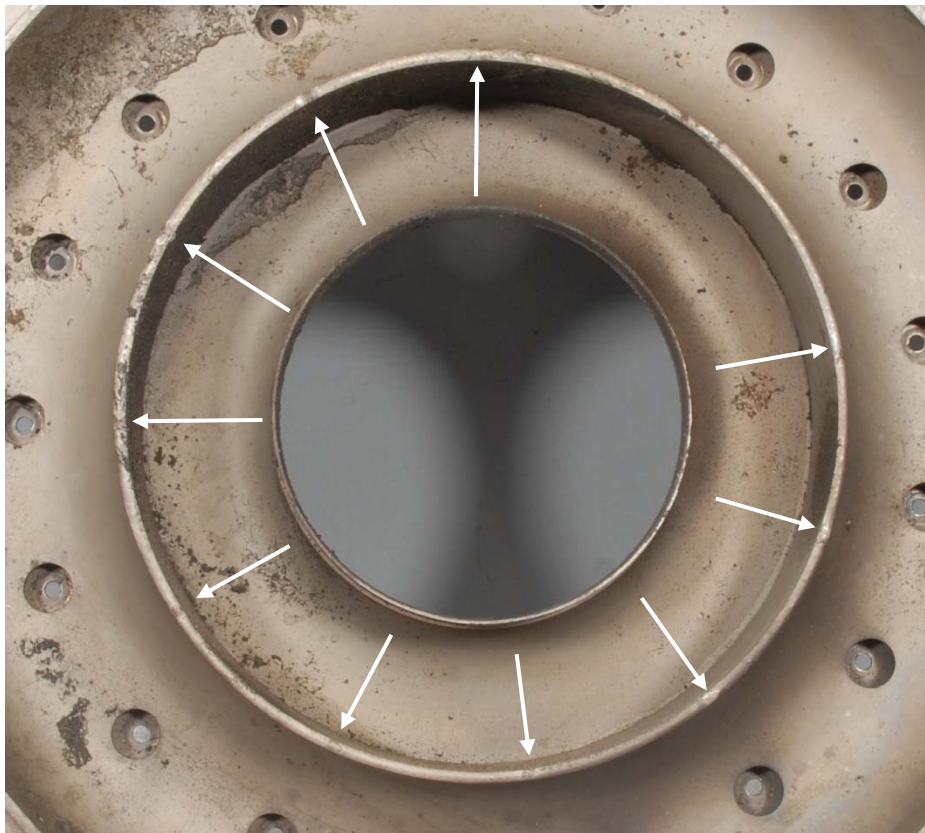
P-79001C, Second-Stage Compressor Housing, Earthen Debris
